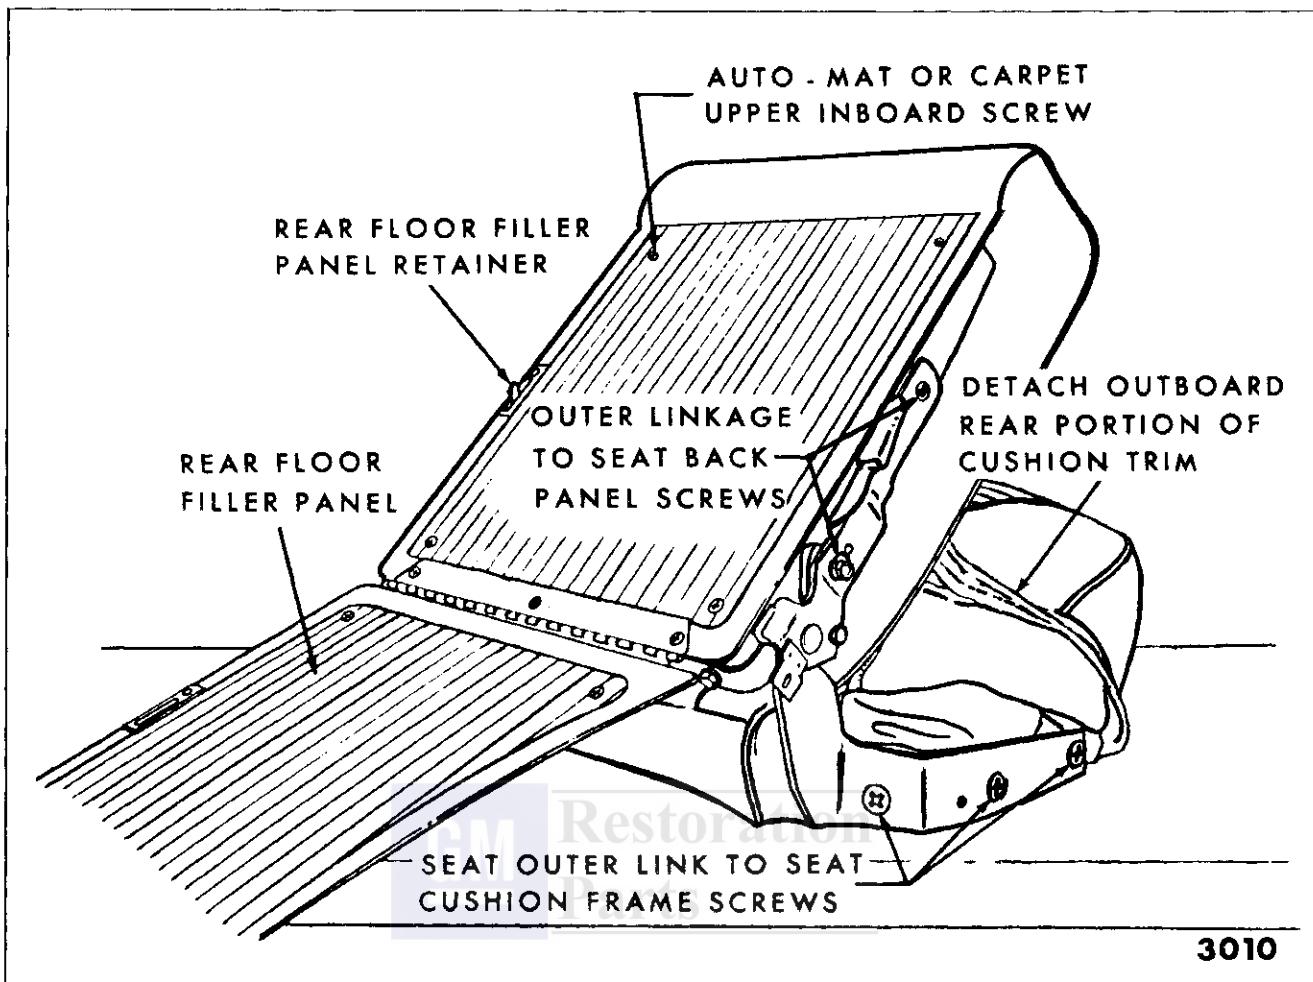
Folding Second Seat Cushion Assembly (Right or Left Side) - "65" Styles
